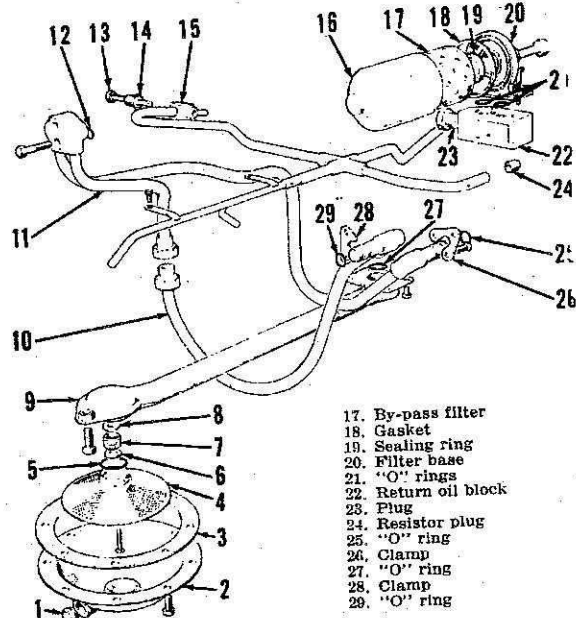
Exploded view of hydraulic lines and filters for early model 770. By-pass filter mounting block (22) was introduced to provide a return port for external hydraulic unit return oil and may be installed on earlier units where needed. Refer to Fig. 212 for model 770 and model 780 using full flow suction filter element instead of by-pass filter (16 to 20).
